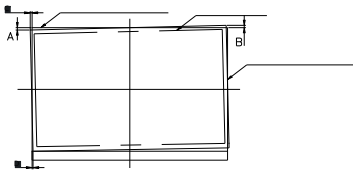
TFT-3D Module Outline Dimensions (Rear view)
